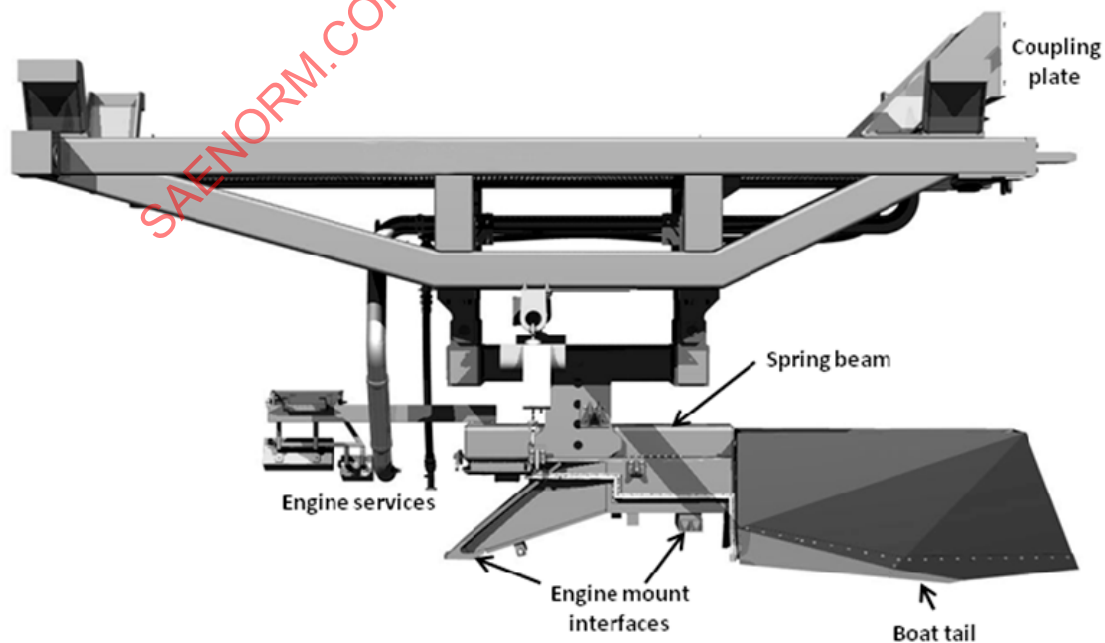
TYPICAL OVERHUNG THRUST STAND ENGINE MOUNTING ADAPTER
